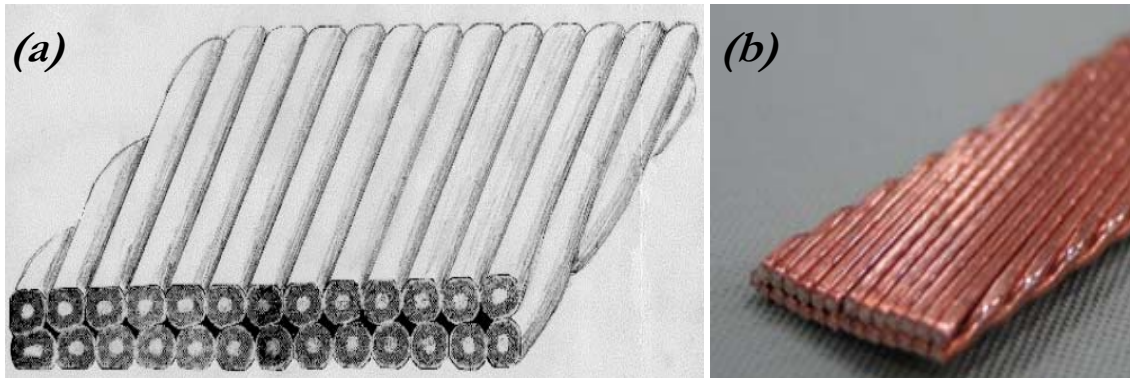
(a) Drawing of a Rutherford cable and (b) a real photo.
